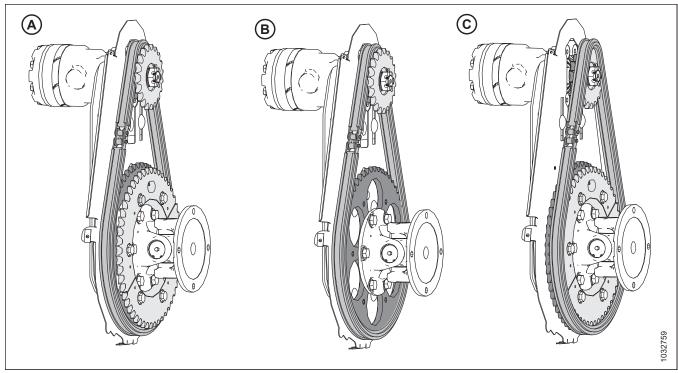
Reel Drive Configurations - Optional Dual Sprockets
